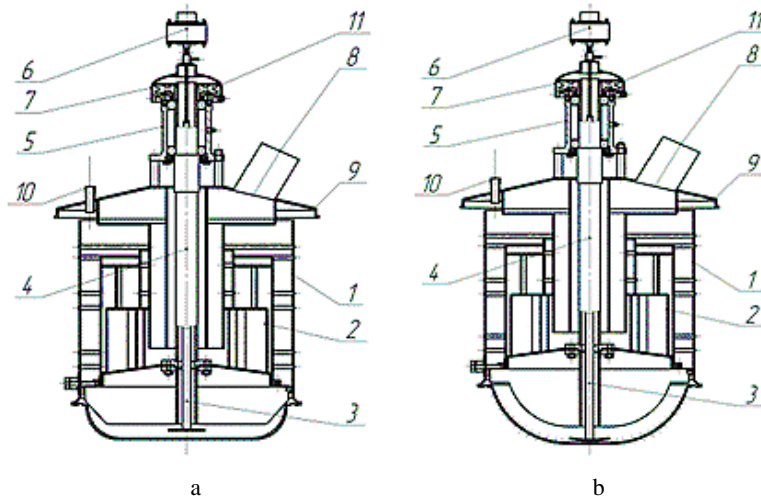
RVP design: a – toroidal shaped basket bottom; b – spherical shaped basket bottom; 1 – basket with perforated bottom; 2 – distributor; 3 – a rod with spraying element, 4 – shaft; 5 – bearing; 6 – oscillator; 7 – metal cap; 8 – nozzle for melt supply before start-up of the vibropriller; 9 – upper casing half; 10 – nozzle for steam supply before shut-down of the vibropriller; 11 – pulley
